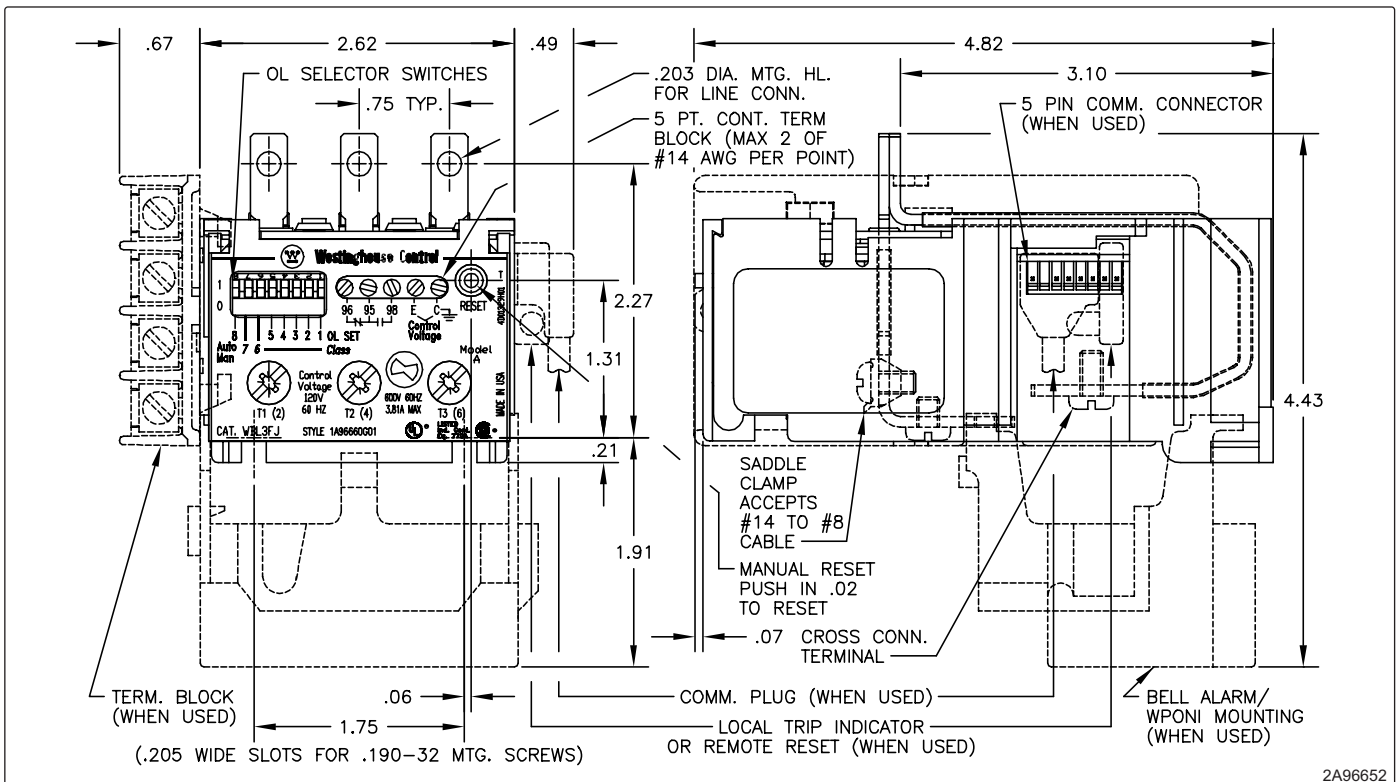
Size 3 and Size 4 Outline and Mounting Dimensions (dimensions in inches)
